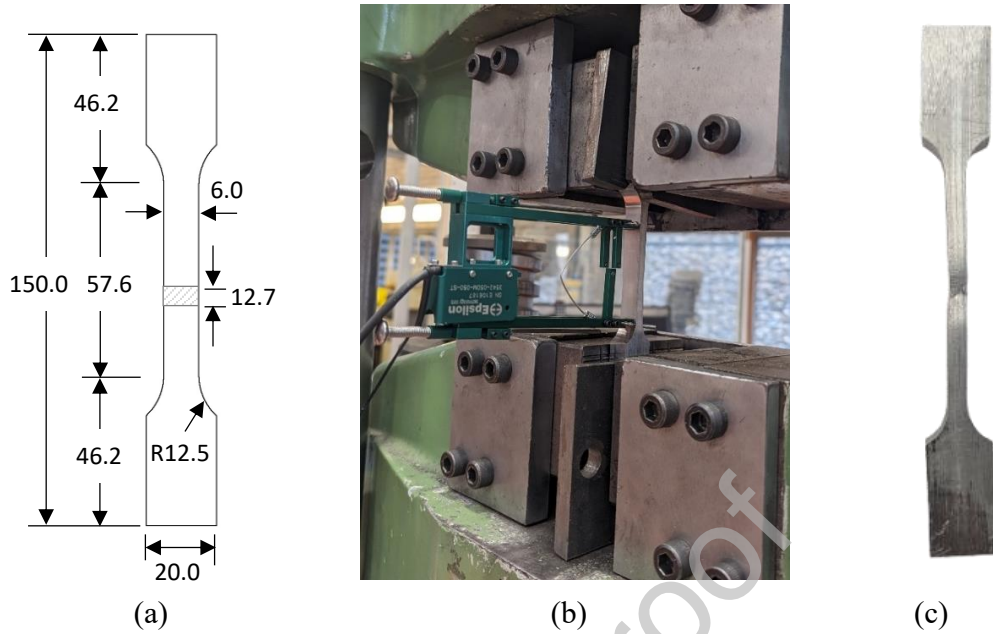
Dog bone (a) sketch in mm; (b) specimen during testing; (c) after testing.
